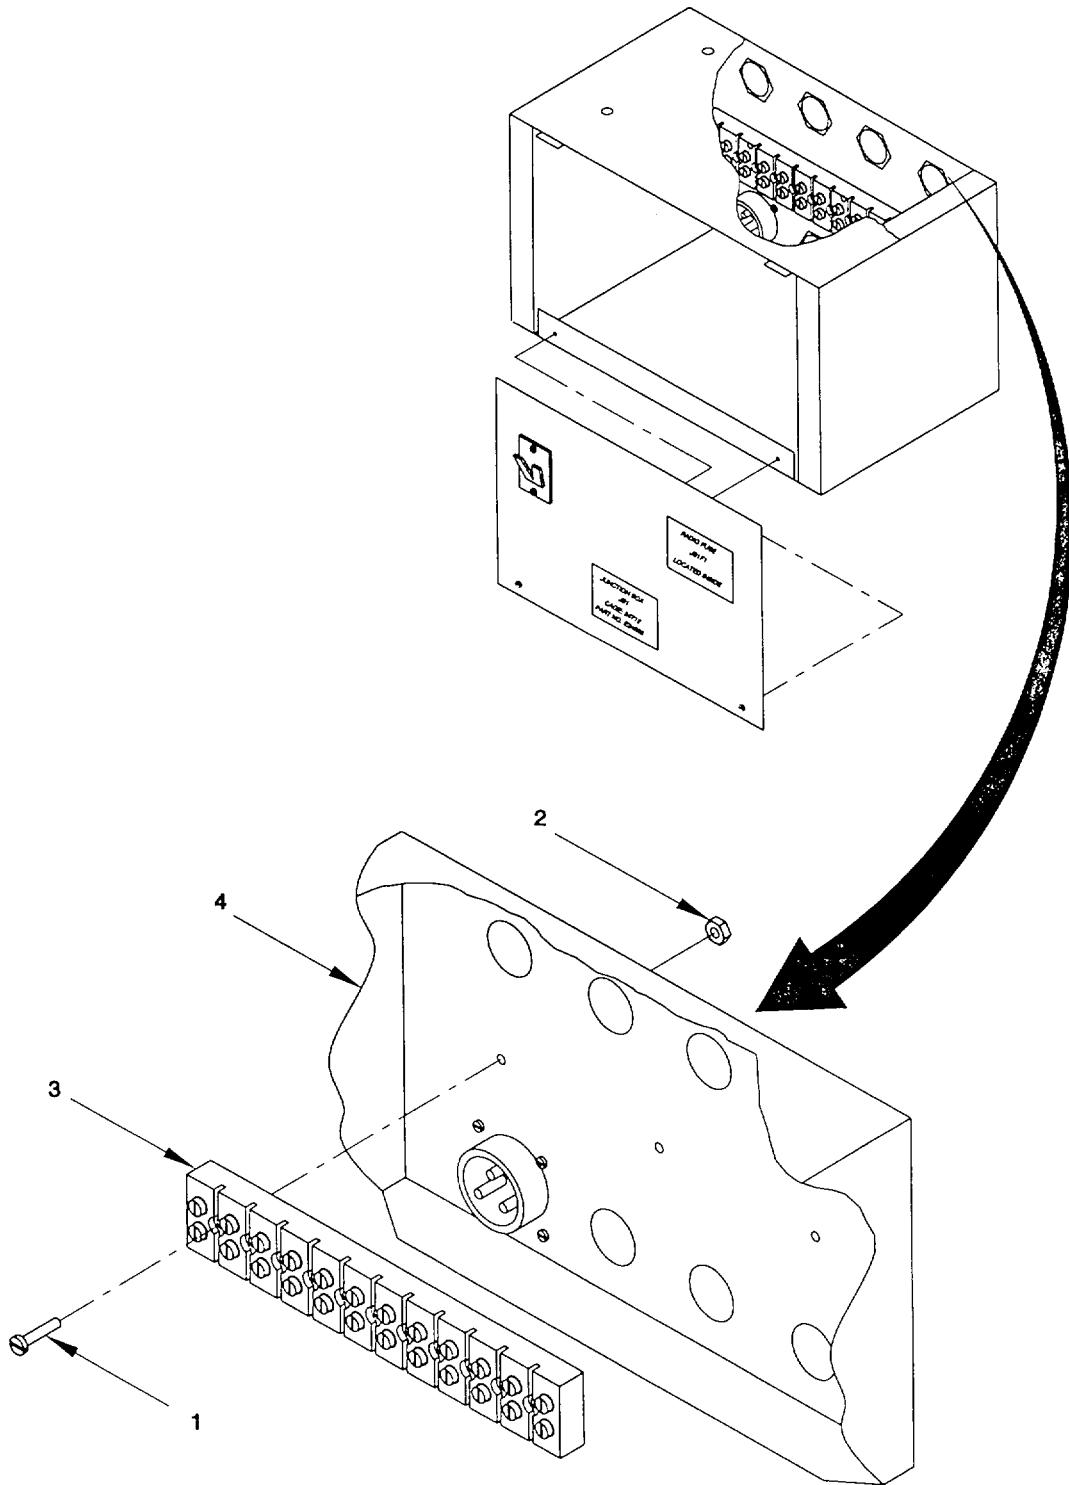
Terminal Board. Cab Junction Box "JB1". Remove/Install.
